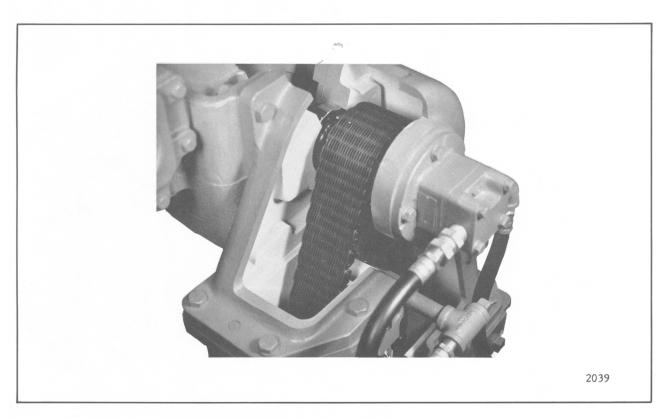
Driven Sprocket, Chain and Oil Pump
